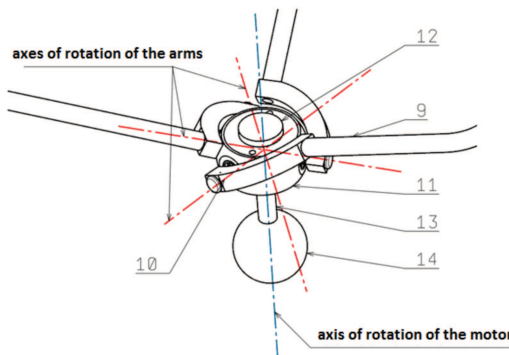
A perspective view of the mobile platform with indicated rotational axes *RobinHand F* [10].
